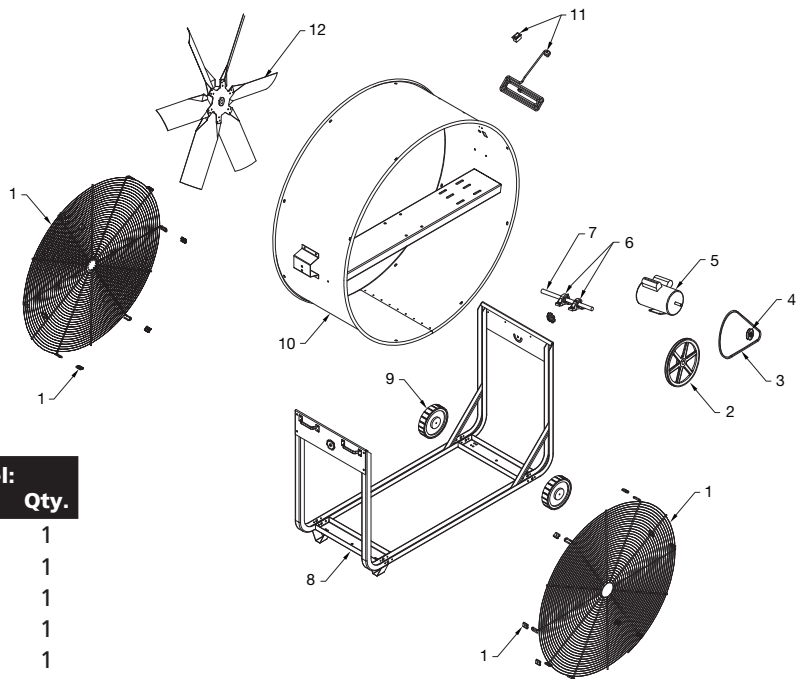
Repair Parts Illustration for Industrial Belt-Drive Mobile Air Circulator
